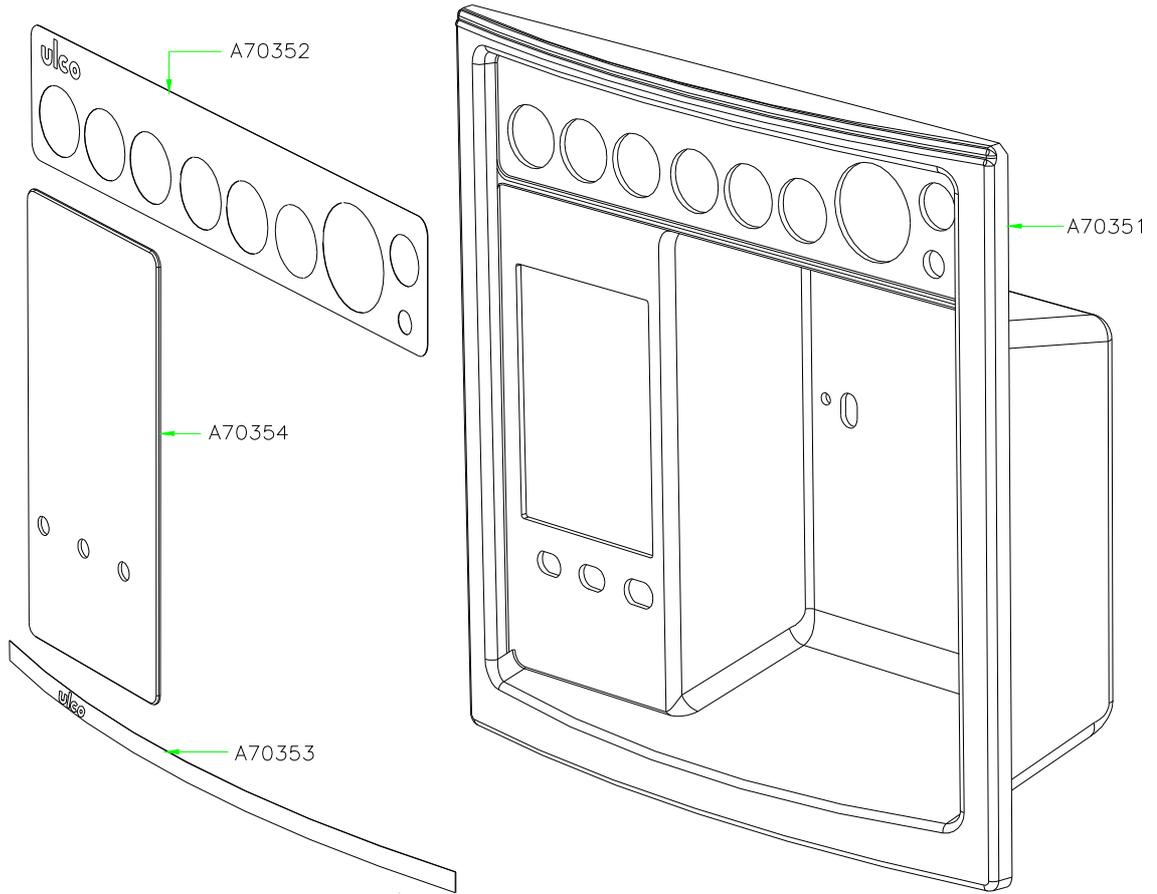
A7035 - COVER / FRONT ASSEMBLY
